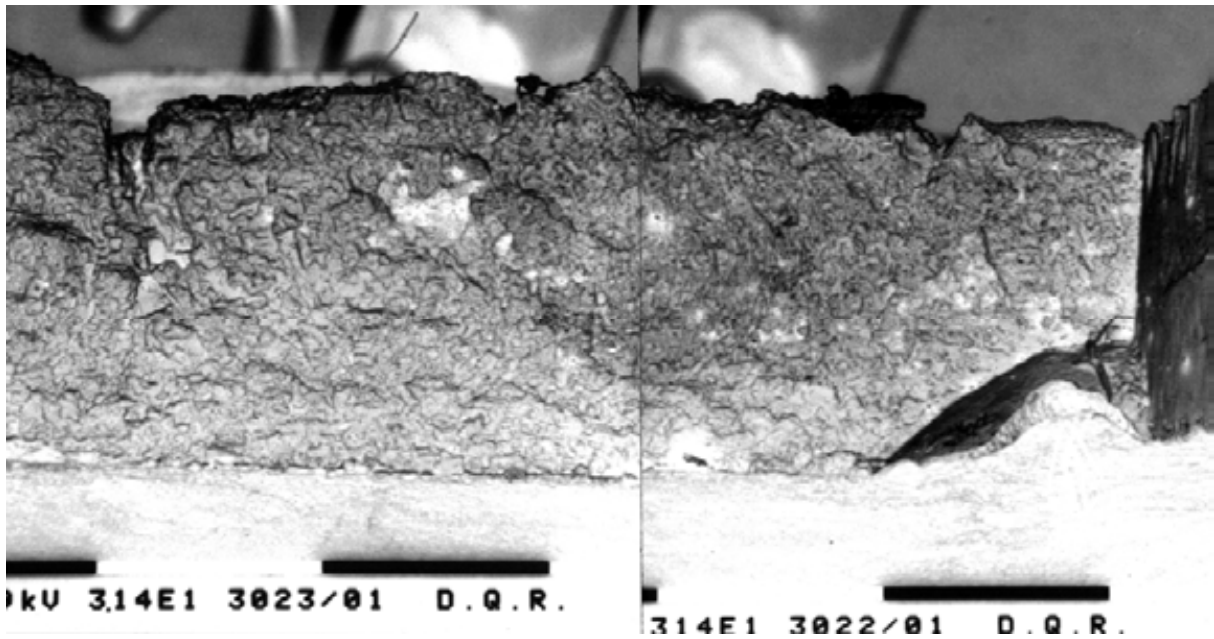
Technovit replica of the fracture surface of the failed rod
